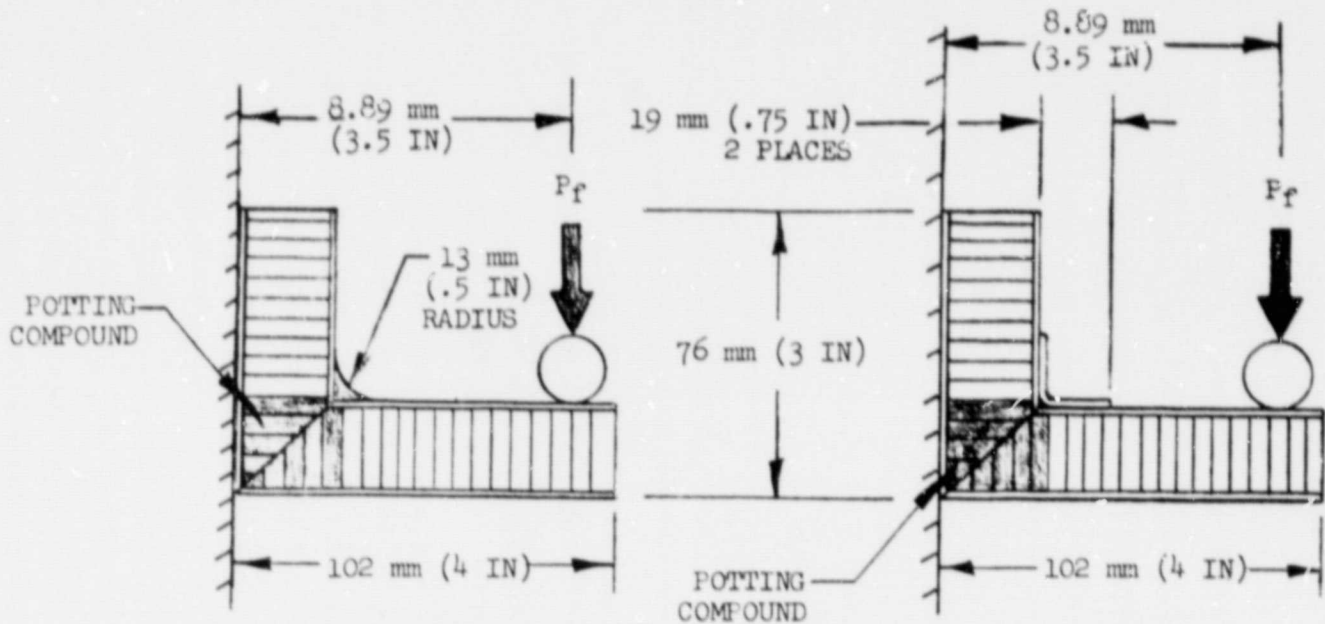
Failed Test Specimens - Insert Study Panels No. 1 and 2
